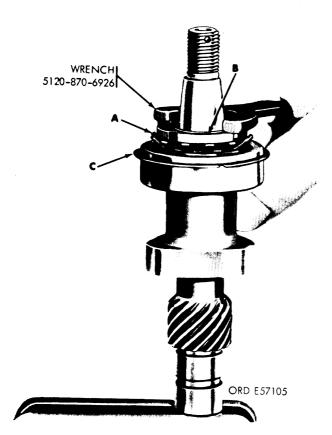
Removing or installing bearing retaining locknut using wrench.
